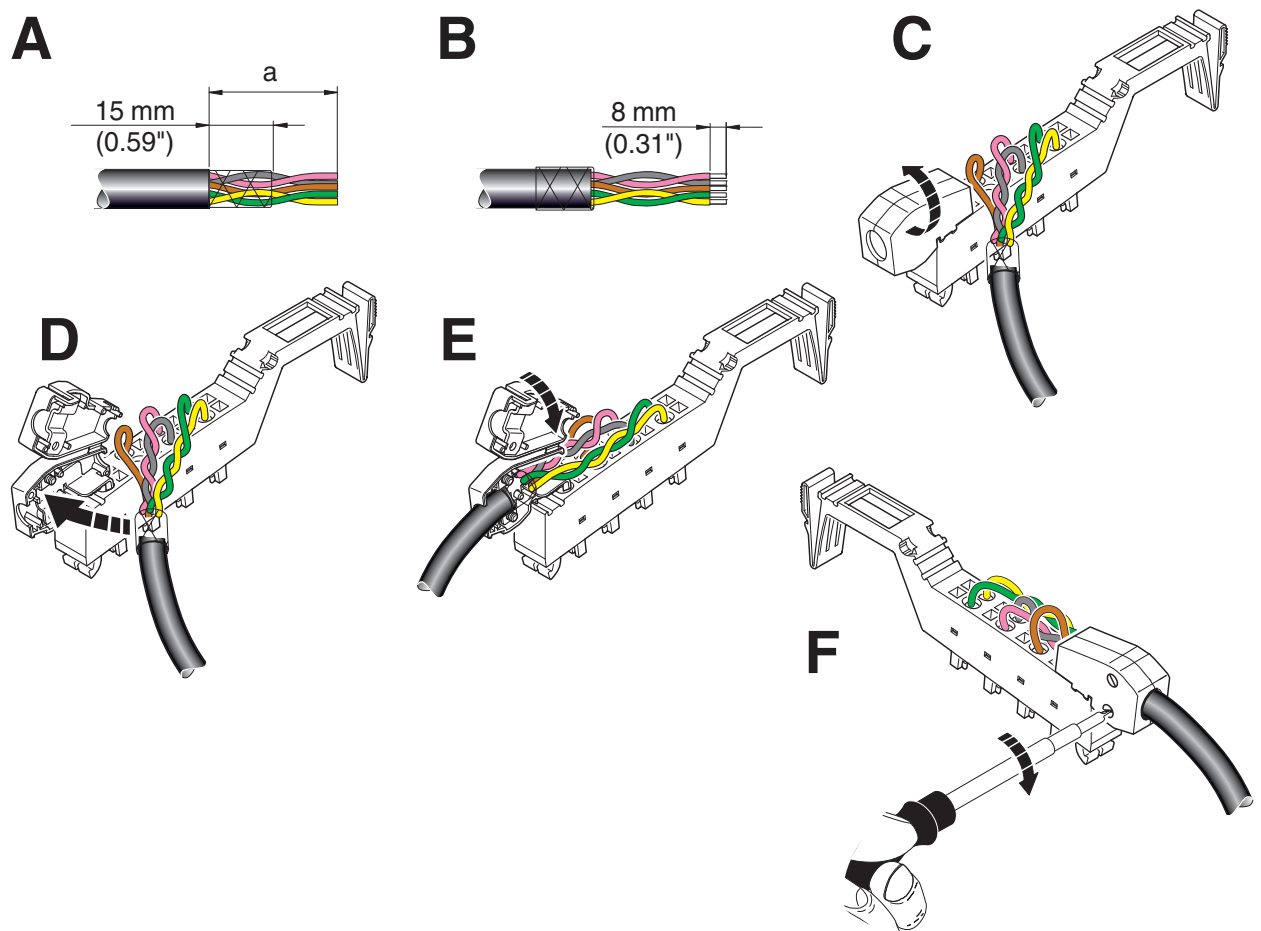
Connecting a shielded cable using the R-IB IL SCN-6 SHIELD shield connector
